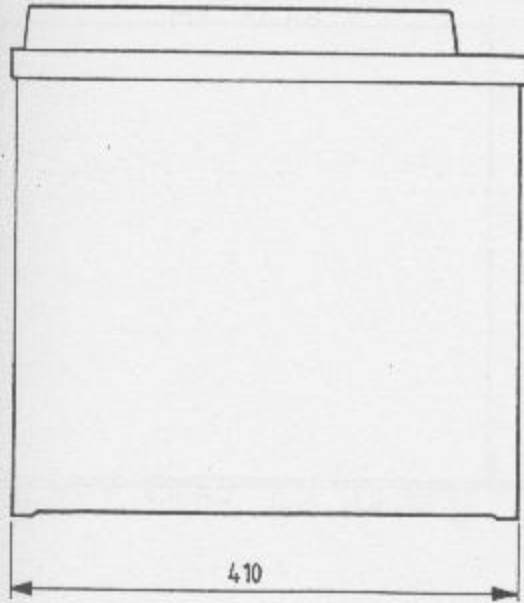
Drawing with dimensions, CF 220 display unit.
